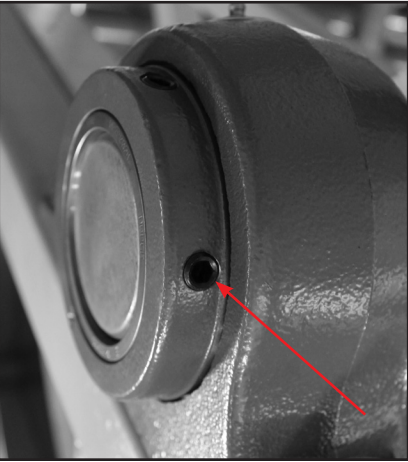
The bearing set screws, one on each side of the rotor, should be checked for tightness every six months.
